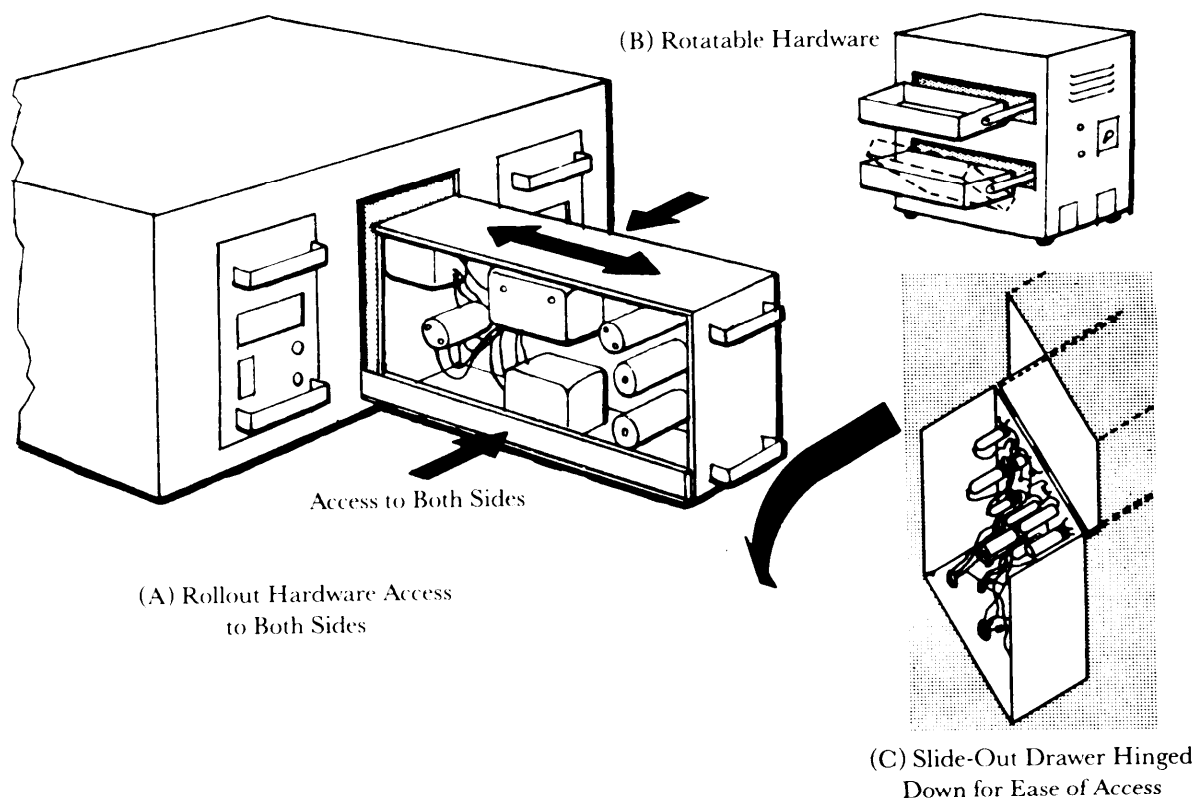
Examples of Rollout, Rotatable, and Slide-Out Drawers (Ref. 3)
